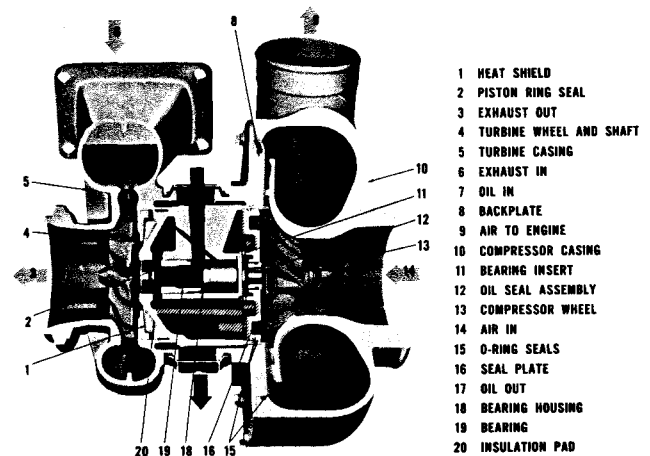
, (AWC-9). VT-50 Turbocharger cross section
